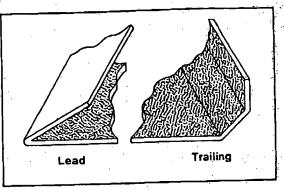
Typical bends required on web offset press plates. The bends are more extreme and exacting than those required for sheet-fed presses due to the narrower cylinder gaps found on web presses.
